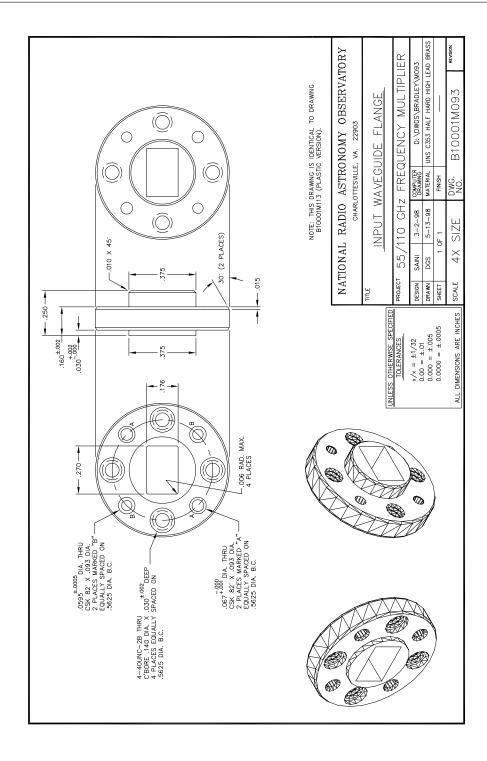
55/110 GHz frequency doubler: Mechanical details of the special WR-19 input waveguide flange.
